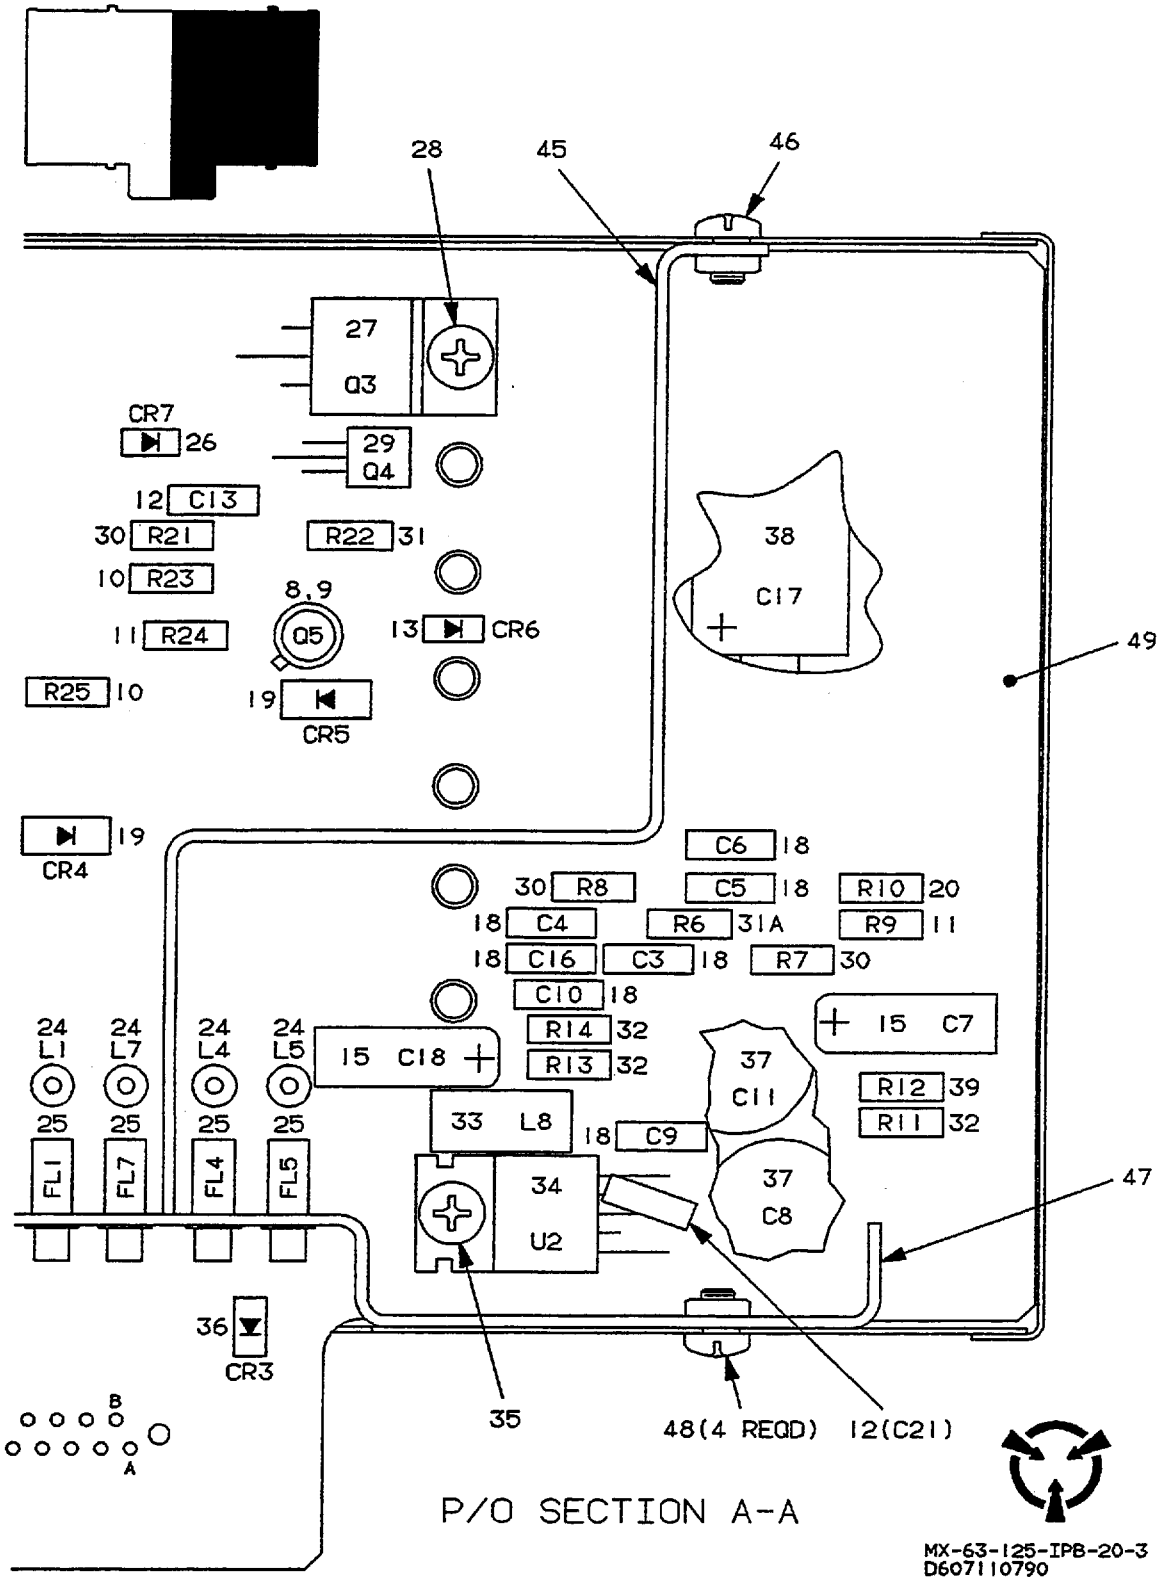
Power Supply/Audio Module Assembly (Sheet 3 of 3)
